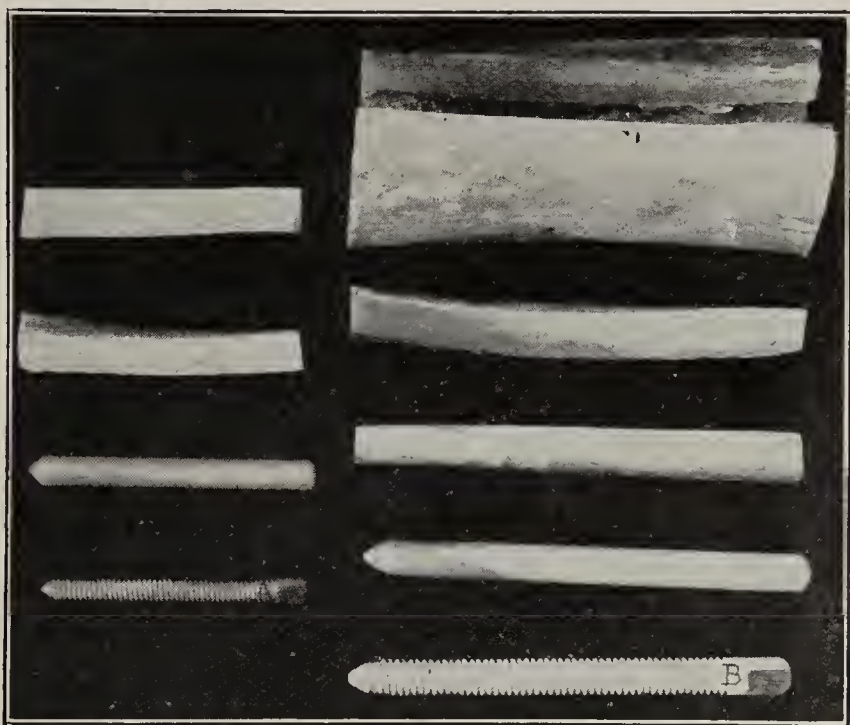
Piece of beef-bone with strips, blanks and screws: A, medium sized screw, 10 by 24; B, large sized screw, $\frac{5}{16}$ by 18.
